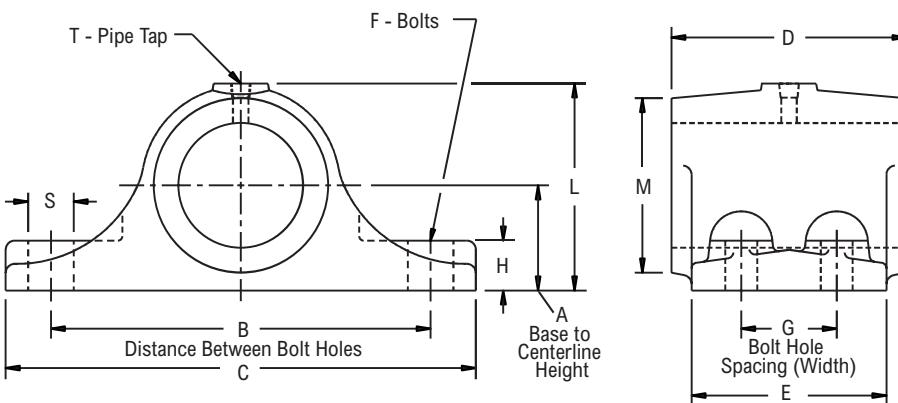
Bolt Rigid Sleeve Bearing Pillow Block Unit with Cast Iron Bushing
